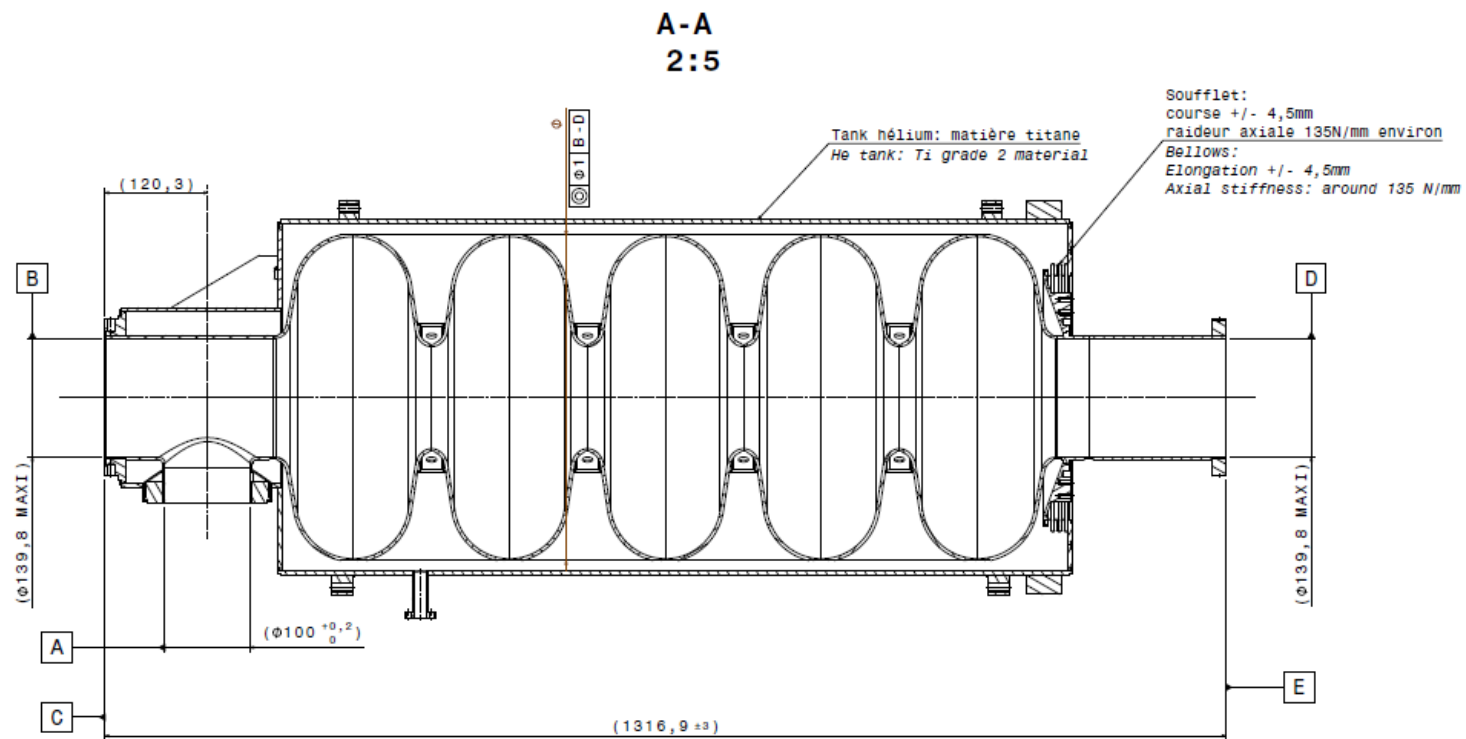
Highlighting the internal section of the cavity – with end flanges removed.
